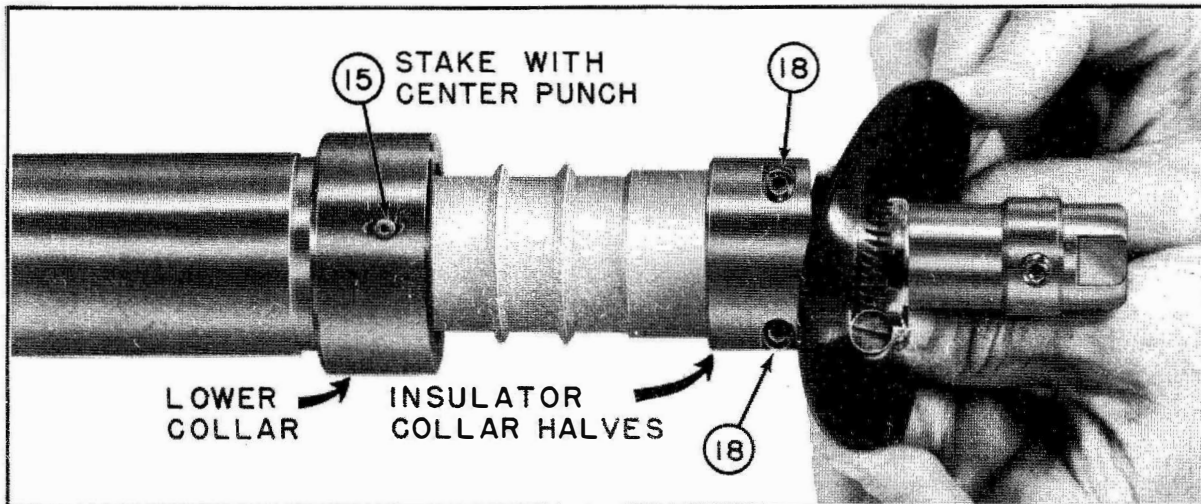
AB-562(XN-1)/U Assembly Completed
